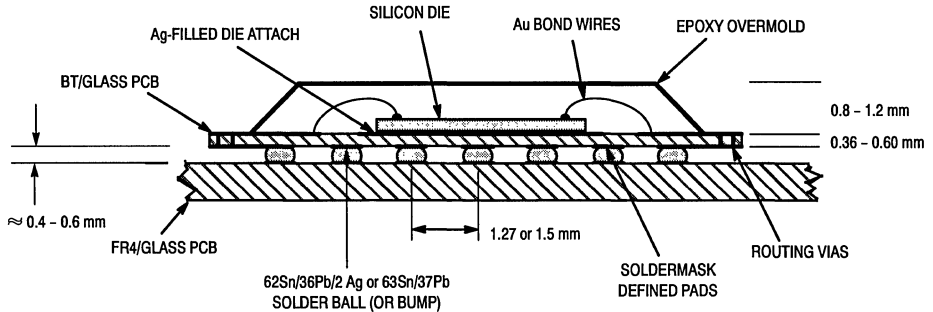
Cross-Sectional View of an PBGA Mounted to a PCB
